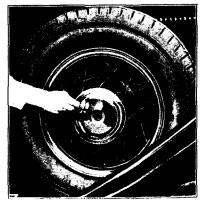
When spare wheels are carried in the fenders, the lock must be removed, after which the screw can be taken out and the wheel lifted from the carrier.
